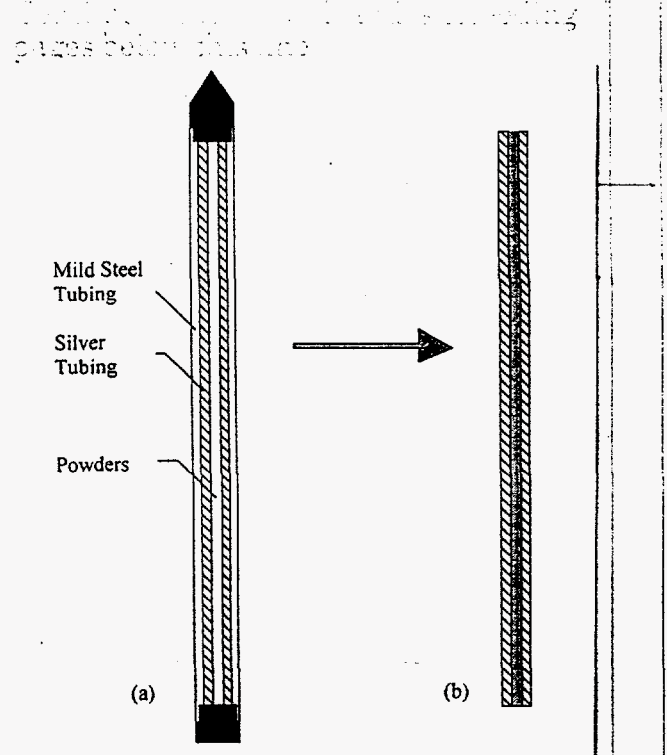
Explosive consolidation assembly: (a) sample is ready to be consolidated; in (b), consolidated rod has been extracted from the steel canister after the explosive consolidation step.
